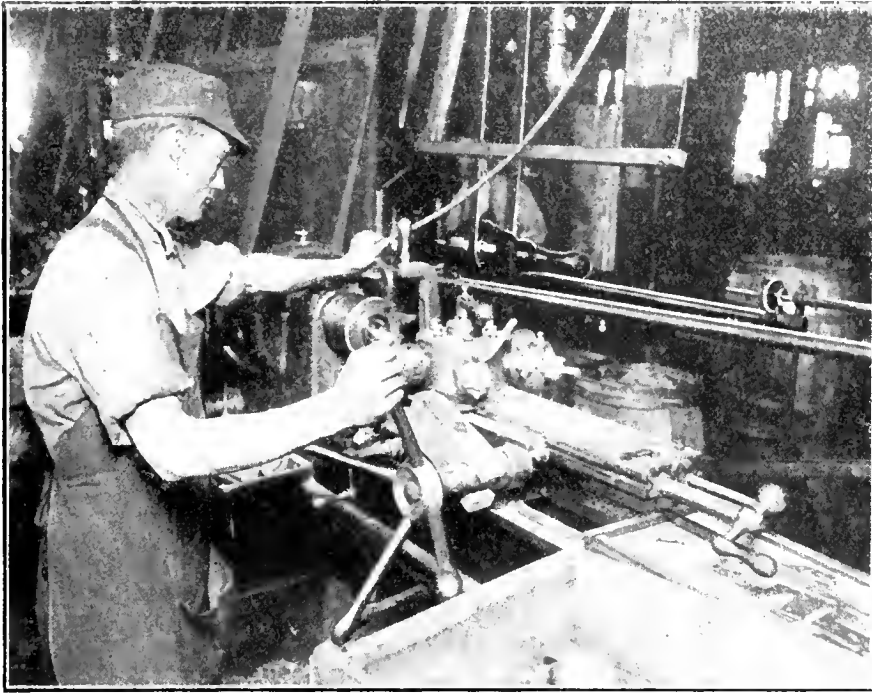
FIRST MACHINING OPERATION ON FUSE SOCKETS.
